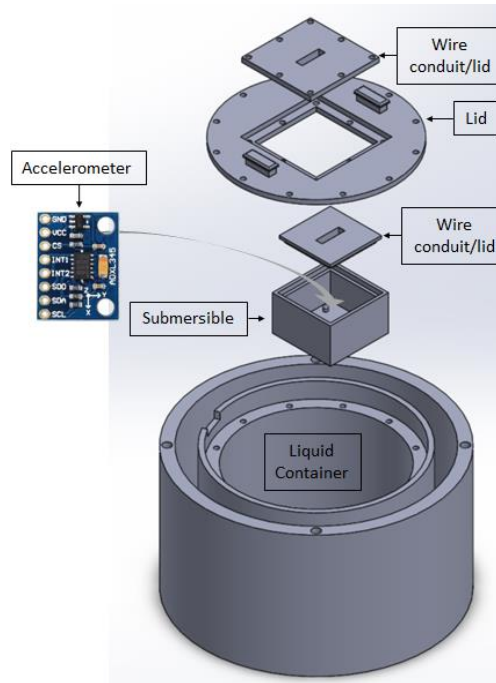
3D model of a single payload unit. The payload unit consists from a container to hold the studied liquid and submersible module to hold the accelerometer. The entire unit must completely leak-proof.
